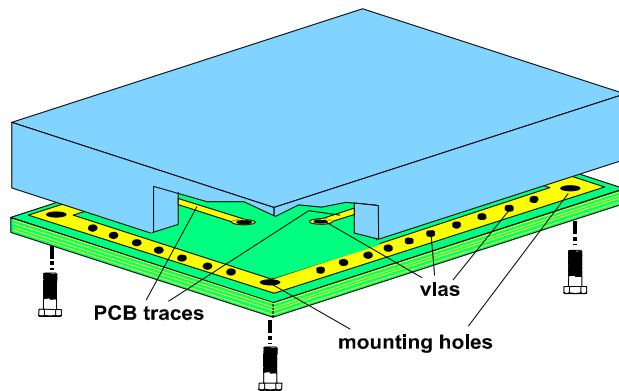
Simplified example of a multilayer board with shielding mechanics.
